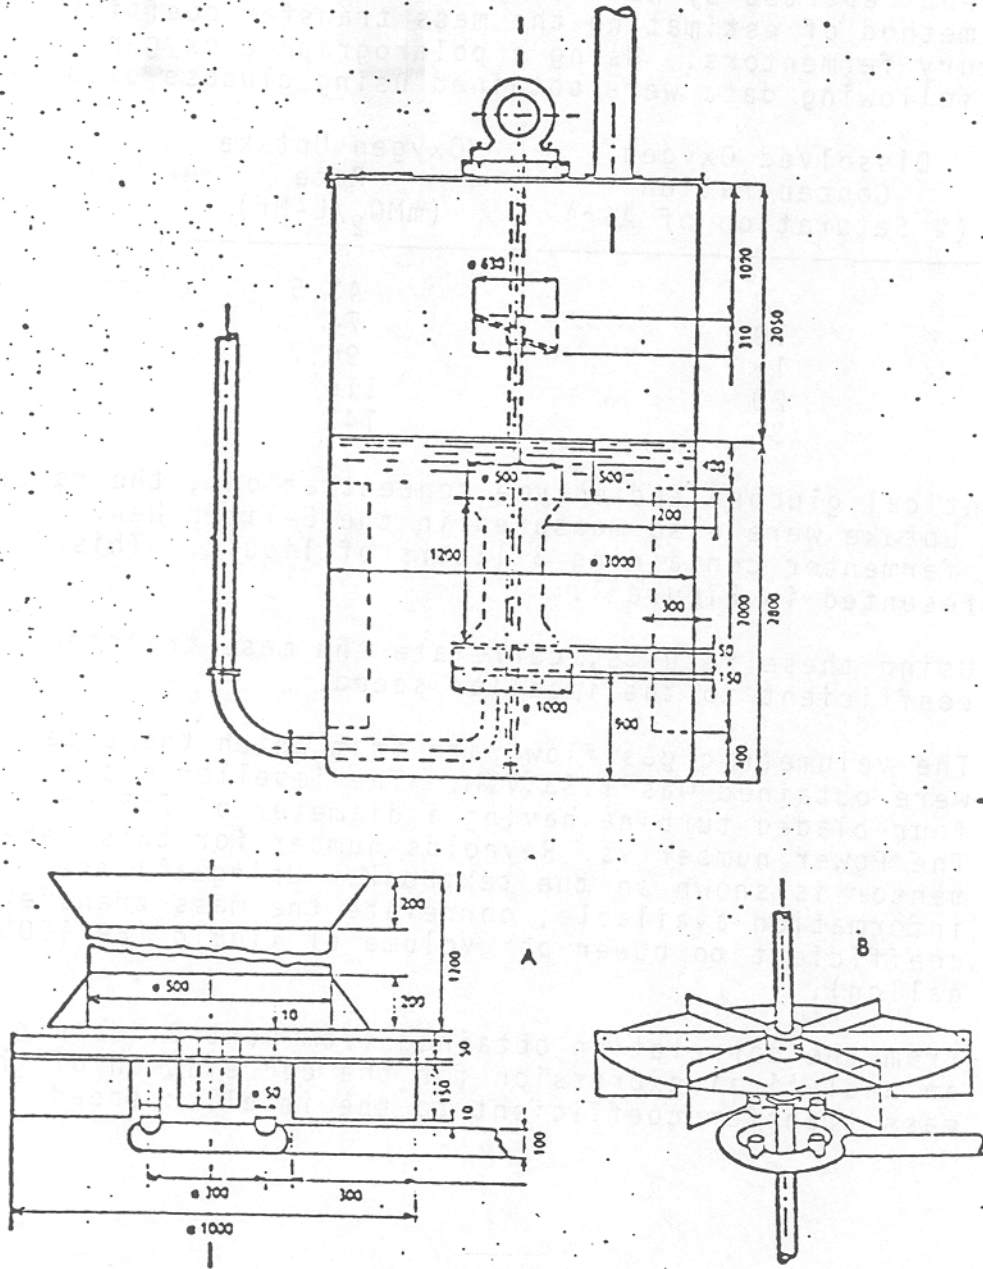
Turbine aeration equipment, A, B - details of the impeller.
